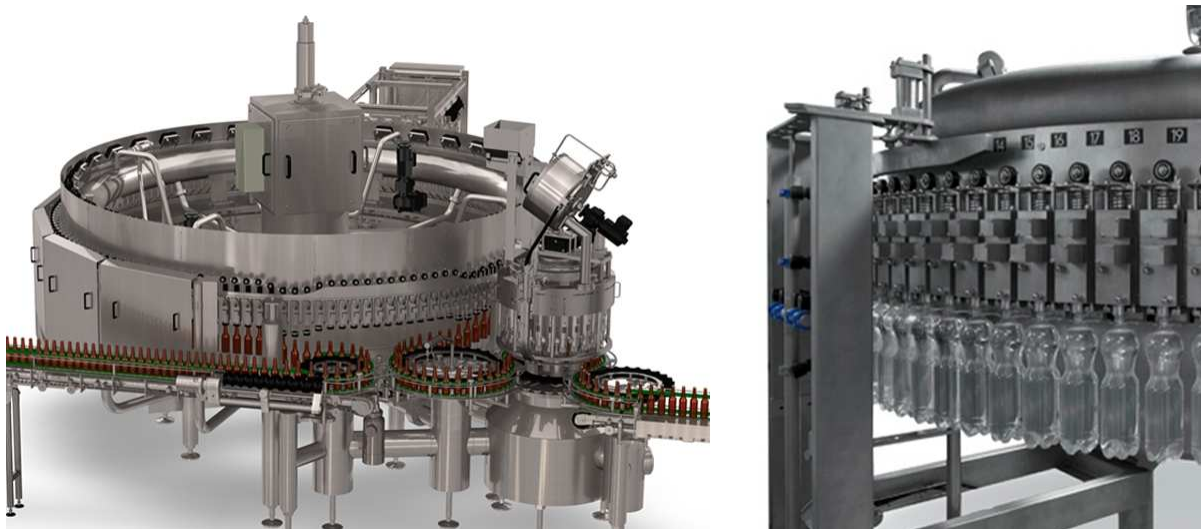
High speed bottling machinery. The KHS Innofill filling and capping machines are the fastest in the industry reaching up to 80,000 bottles per hour (22Hz). Residence time is increased by passing bottles around a large circumference. [14, 1]
